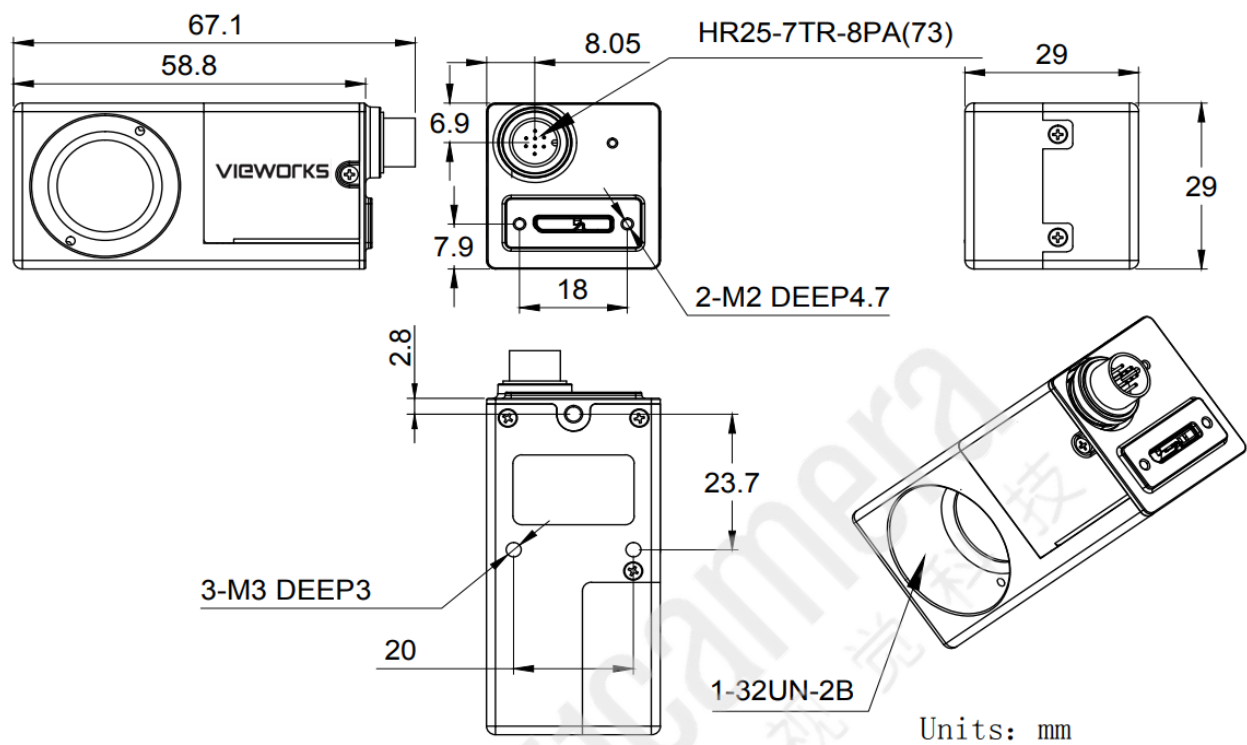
Mechanical Dimension (VZ-20MU-M/C19H00)
